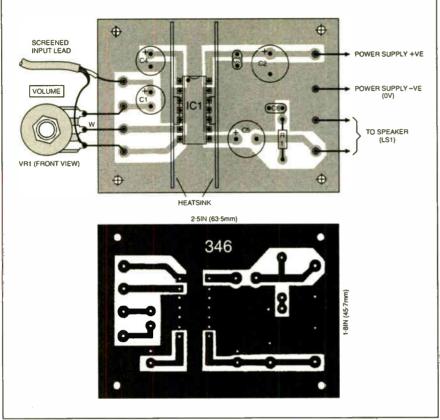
The LM380N printed circuit board component layout, off-board interwiring and full-size copper foil master pattern. Note the heatsinks.
